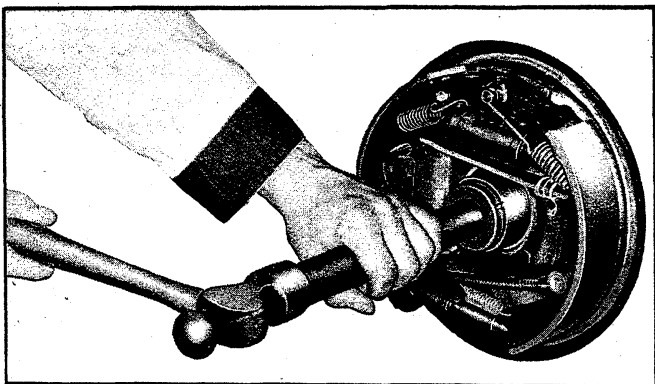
Wheel Bearing and/or Oil Seal Installation
